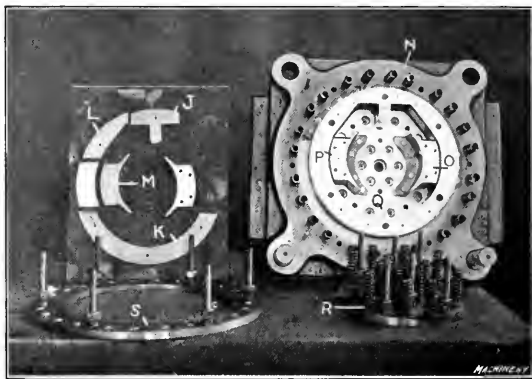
Lower Half of Die with Strippers removed; also Templets for the Punch Sections
